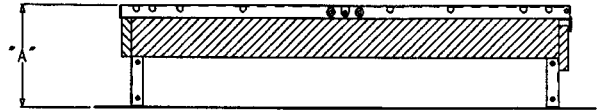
Dimensions; 657A036-060 With Optional Base Rail
